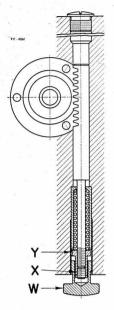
Backlash Eliminator for No. 2 Universal Machines only
